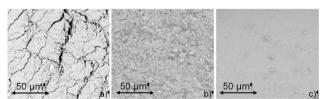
Comparison of surface finish (SEM), a) diamond turning – rough machining, b) diamond turning – finishing, c) milling.
